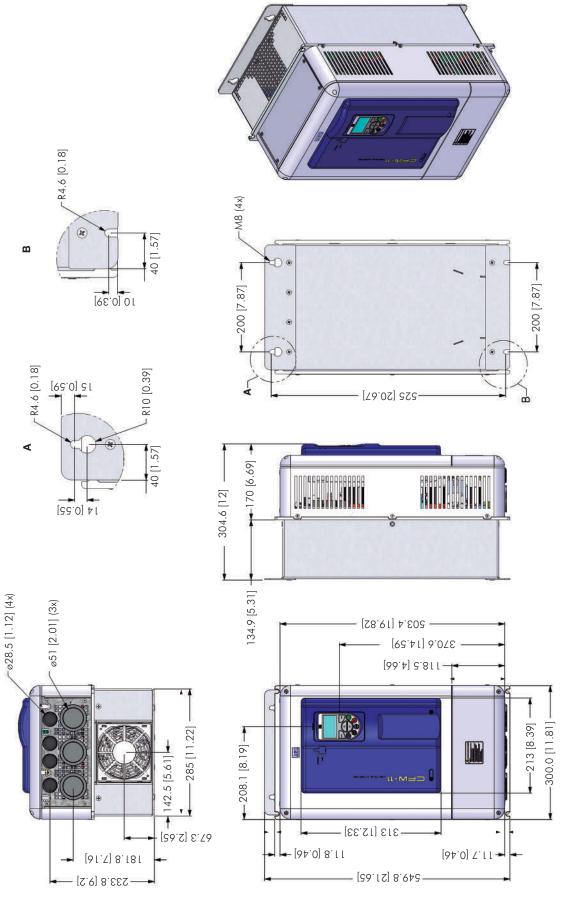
Inverter dimensions - frame size D - mm [in]
